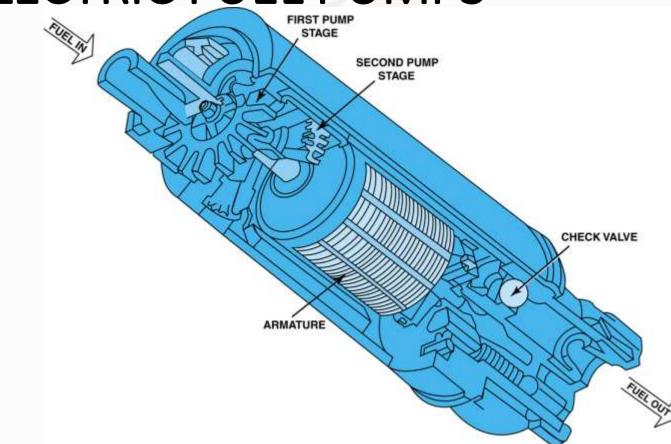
A cutaway view of a typical two-stage turbine electric fuel pump.
